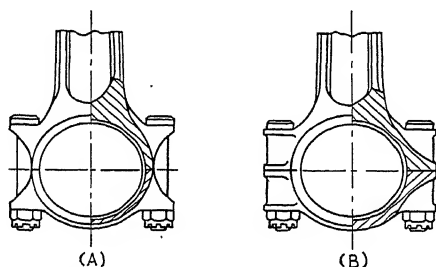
Aircraft-engine connecting-rod big ends. (A) Poor design that was subject to frequent crankpin-bearing failures. (B) Later design that eliminated the failures. (From Ricardo, "High Speed Internal Combustion Engines.")
